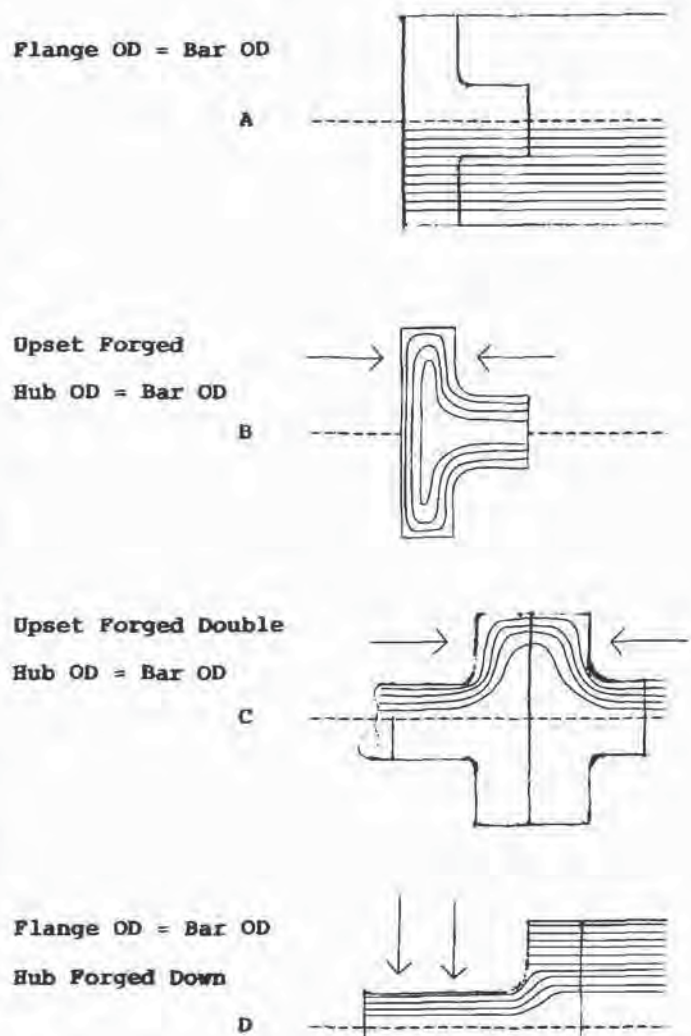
Sketches of methods to produce flanges to an ASTM steel fittings specification using forged or rolled bar stock as the starting material: Method A, direct machining from bar is not permitted by the fitting specifications; Method B, by upsetting the flange from a starting bar size close to the flange hub size; Method C, by upsetting a double flange forging from bar close to the hub diameter; Method D, by starting with a bar size equal to the flange OD and forging the hub down. This may not be permissible by the fitting specification rules.
